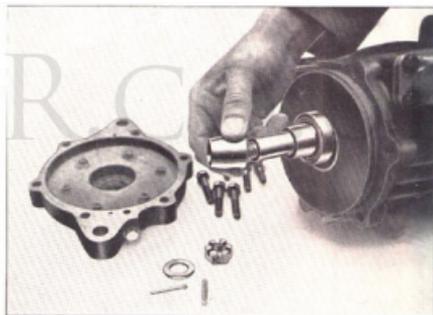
Placing the seal guide in position, prior to assembly of the drive end cover.
